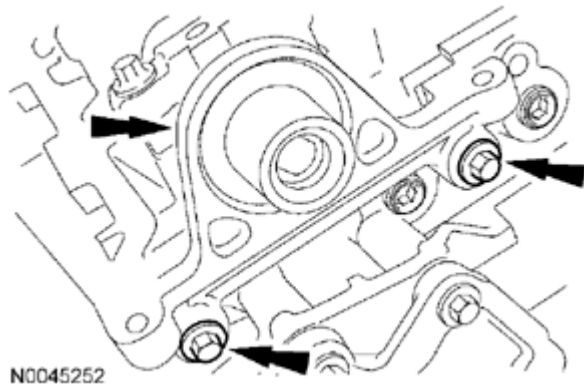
Locating Bolts And Camshaft Oil Seal Retainer
